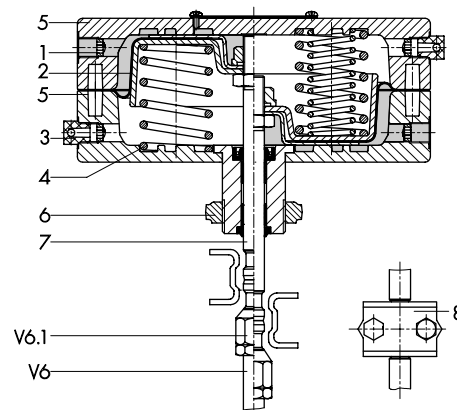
· Sectional drawing of the Type 3271-5 Pneumatic Actuator (right half of diaphragm with additional springs)
